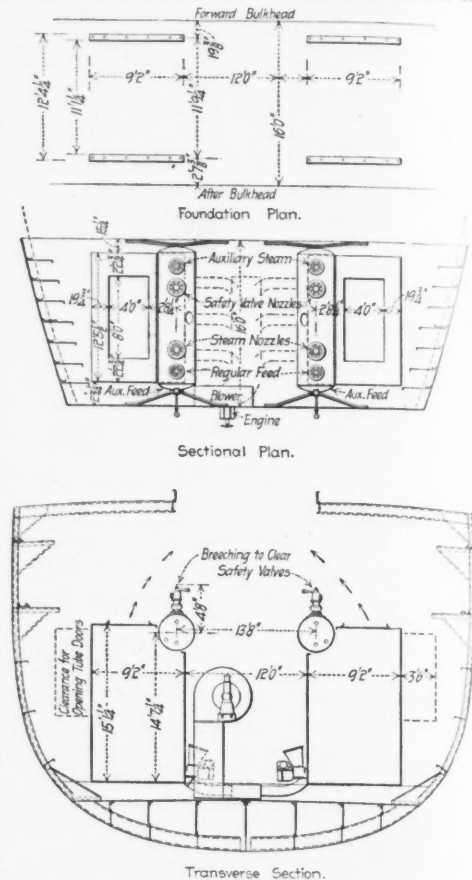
Cross-Section and Part Plan of Hull, Showing Position of Boilers.
